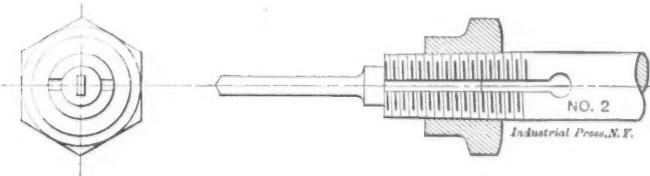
Drill for Drilling Hole in Brass Stopper.
